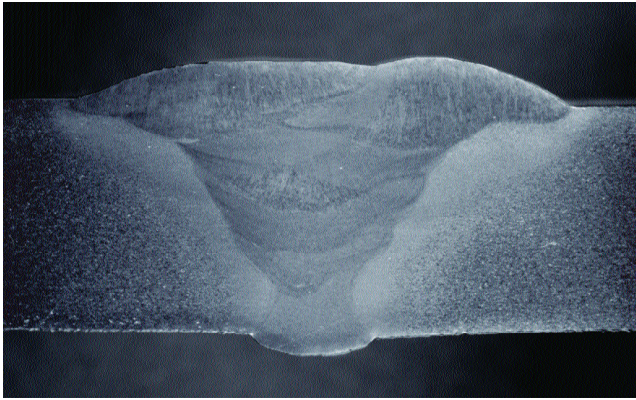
Cross section of conventional multipass pipe weld with 0.50-in. (12.7-mm) thickness.
